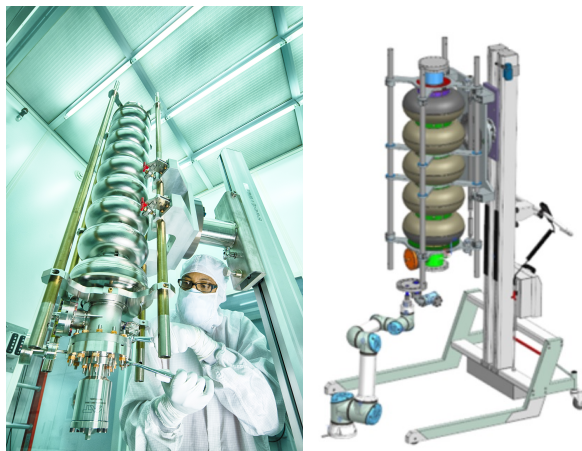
A technician and a robot performing a vertical test final assembly.
